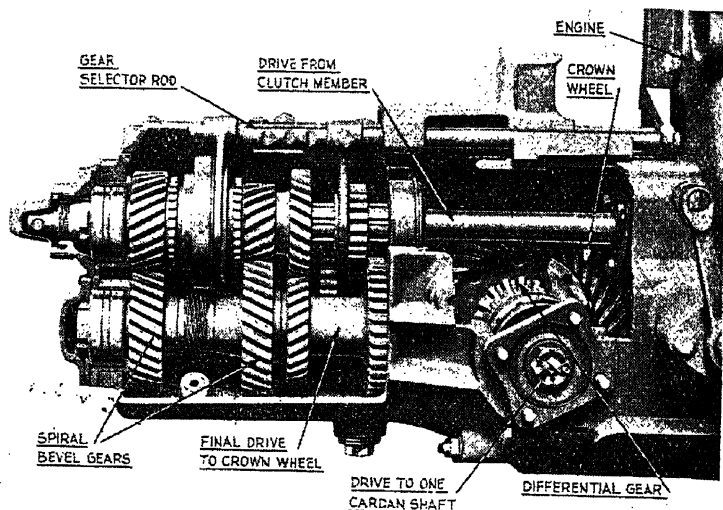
Citroen Gearbox and one Final Drive Unit.
